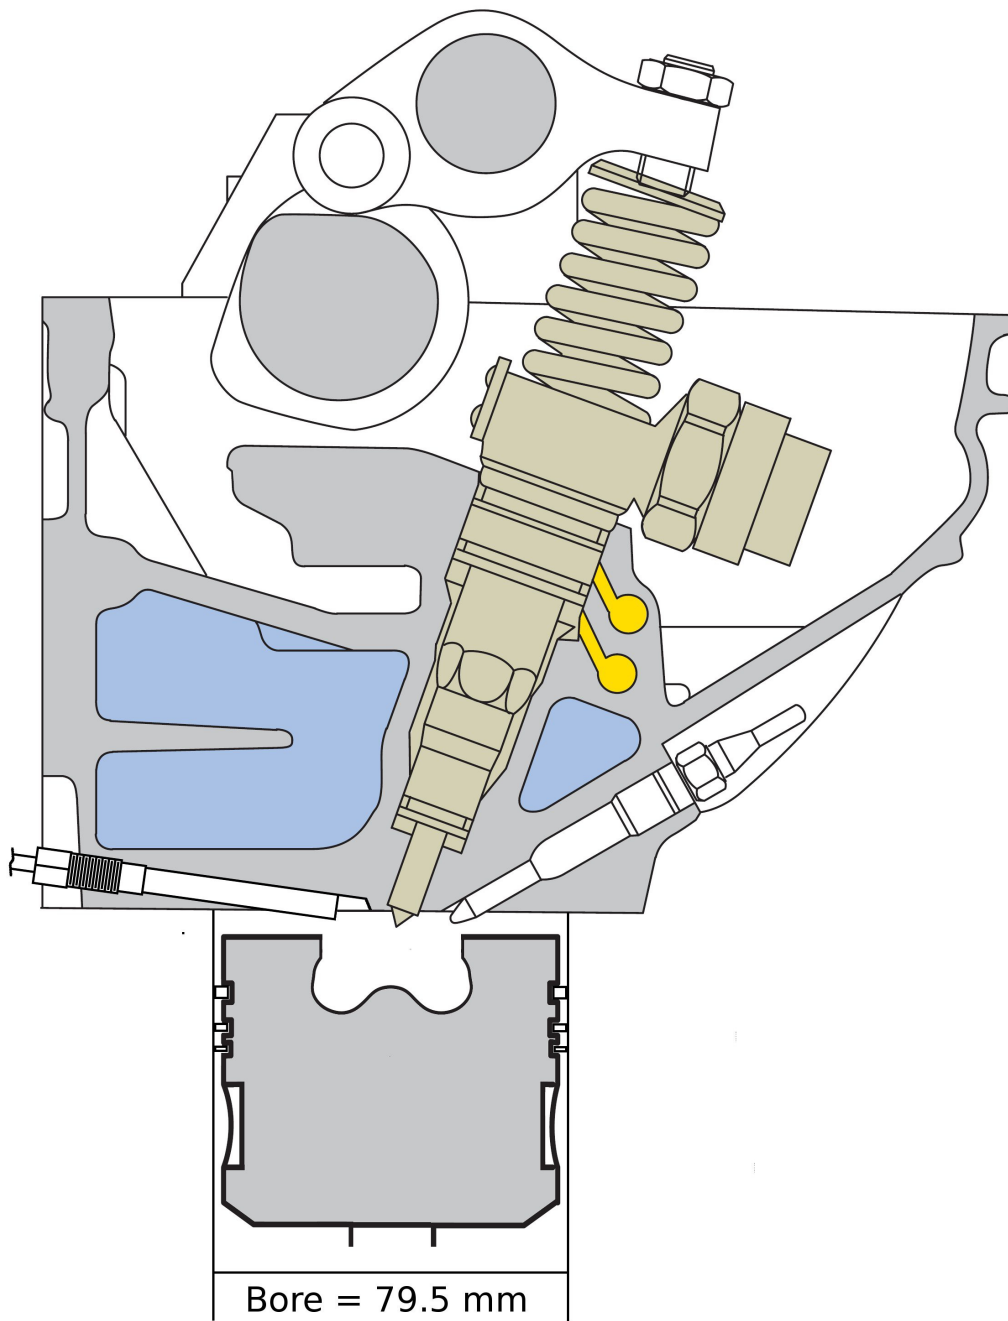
shows typical installation of a fiber optic pressure transducer in the cylinder head of a 1.9L TDI engine [1] on the left side of the cylinder head. The glow plug is on the right side. The fuel injector is the center. The pressure sensor is mounted at an 8 degree angle. A glow plug-type seal is located 5.5 mm down from the thread. Between the seal and the tip, the sensor OD is 5.6 mm. In the tip, pressure is sensed by an inconel diaphragm. The pressure deflection of the diaphragm is measured by Fabry-Perot interferometry with light delivered to the tip by a pair of optic fibers. For a Diesel engine, the sensor requires a measurement range of 0-200 bar. The tip must withstand temperatures up to 400 deg. C. Such a sensor is made by Optrand Inc [2].
